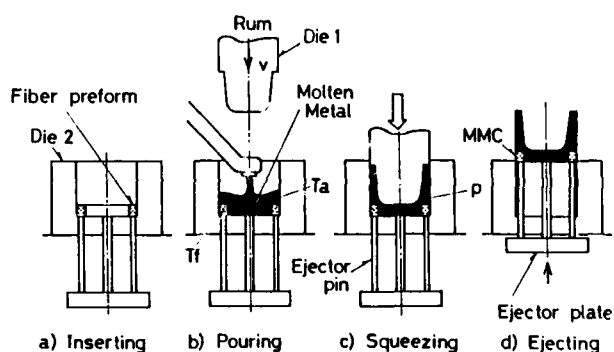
Direct squeeze casting operations, in which the molten metal is poured on the preform directly.
